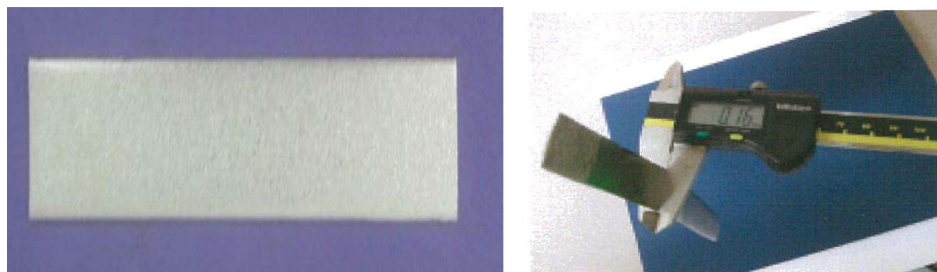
In-Bi-Sn alloy sheet produced by tape casting.
